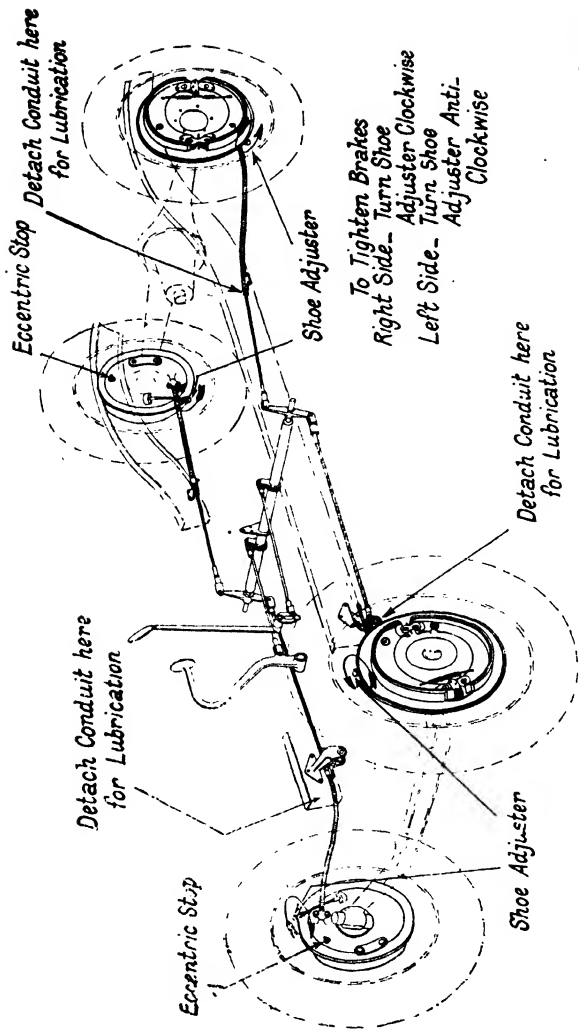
A TYPICAL BENDIX OPERATING SYSTEM, SHOWING THE CROSS-SHAFT, RODS, LEVERS, AND CABLES EMPLOYED TO COUPLE THE BRAKING UNITS TO THE PEDAL AND THE HAND LEVER
